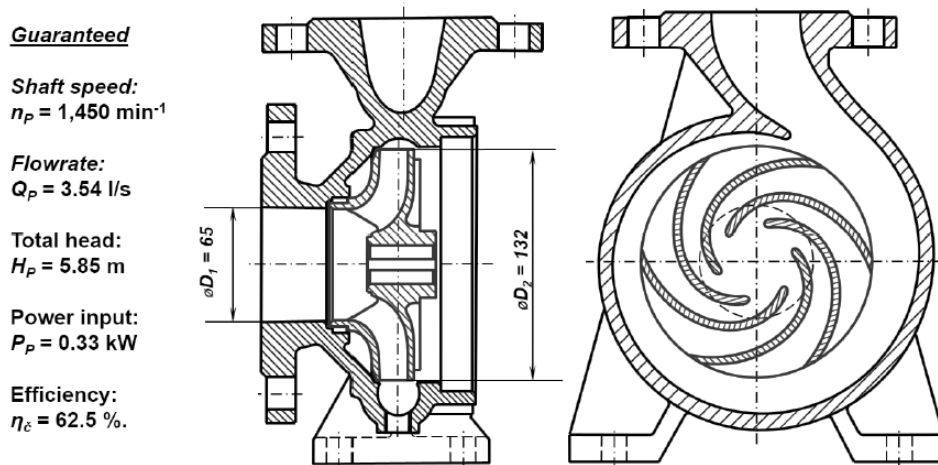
Cast iron impeller in spiral casing and parameters of pump (Polák, 2019)
